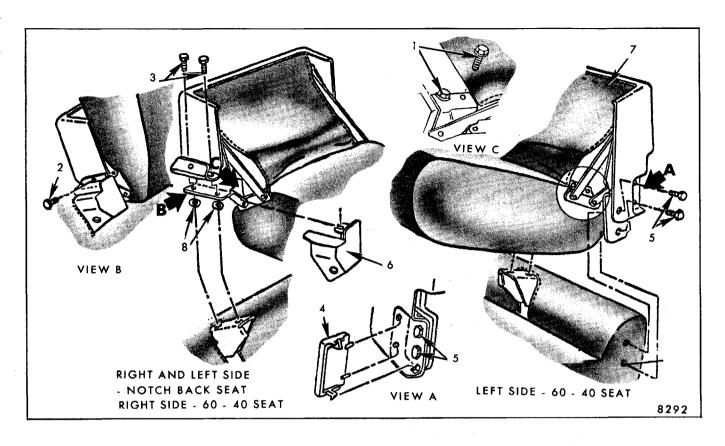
Front Seat Center Armrest - Full Width Notch Down and 60-40 Seat - E Styles
